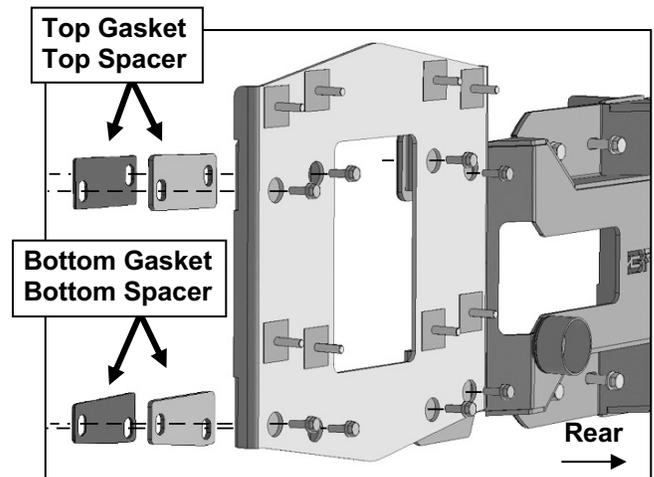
Inner Hinge Reinforcement Bracket and Shims installed
